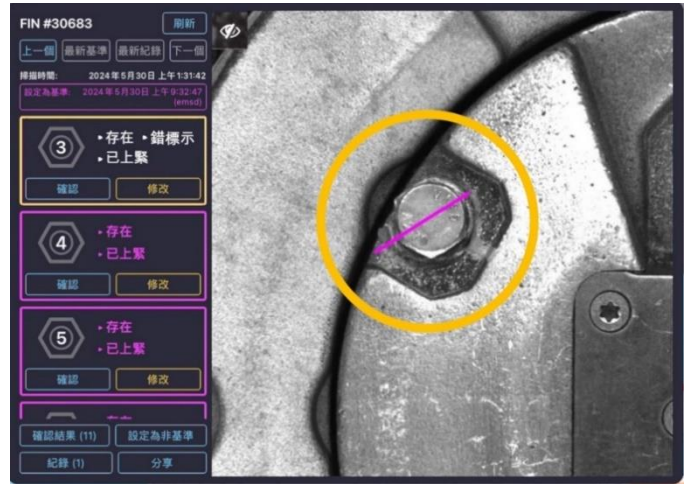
Wrong Bolt with Wrong Bolt Marking was highlighted in the Operator Mobile Device
